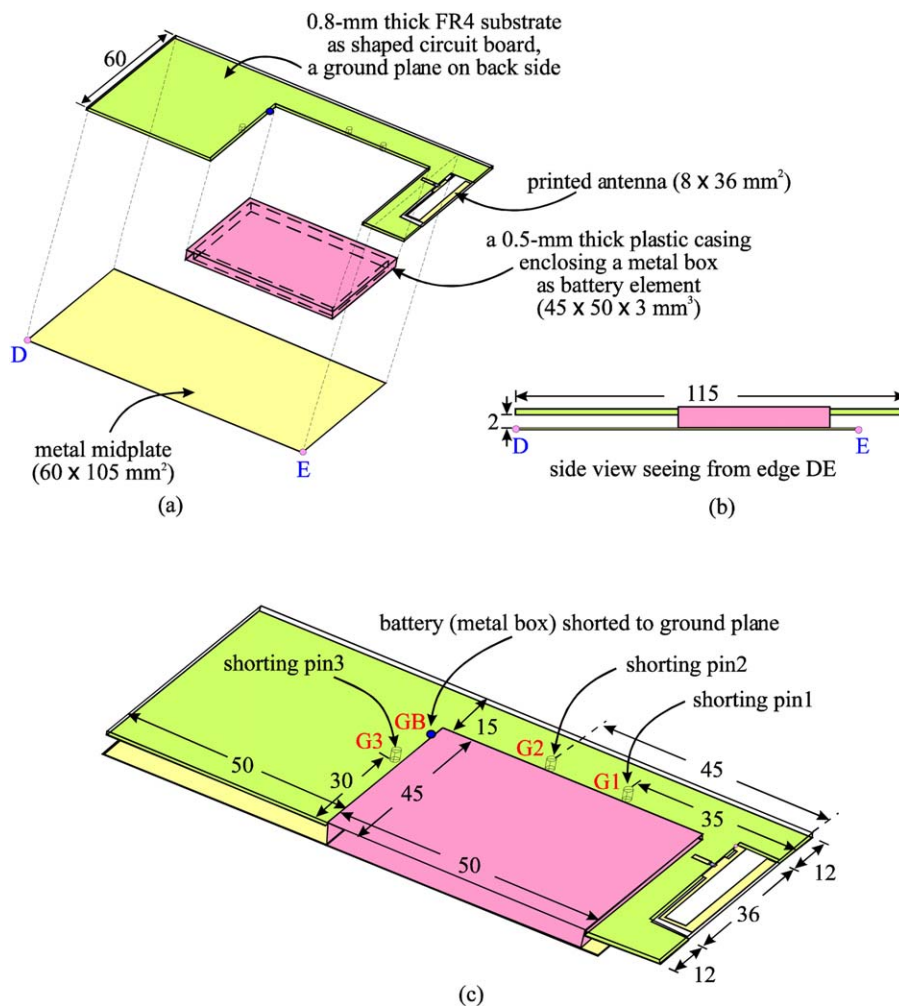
Proposed WWAN/LTE handset antenna with shaped circuit board, battery, and metal midplate. (a) Exploded view. (b) Side view. (c) Front view. [Color figure can be viewed in the online issue, which is available at wileyonlinelibrary.com]
